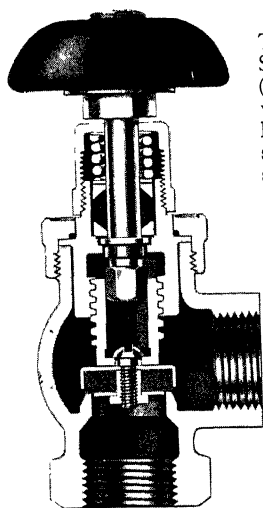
Webster Type "WB-P" Iron Radiator Valve
